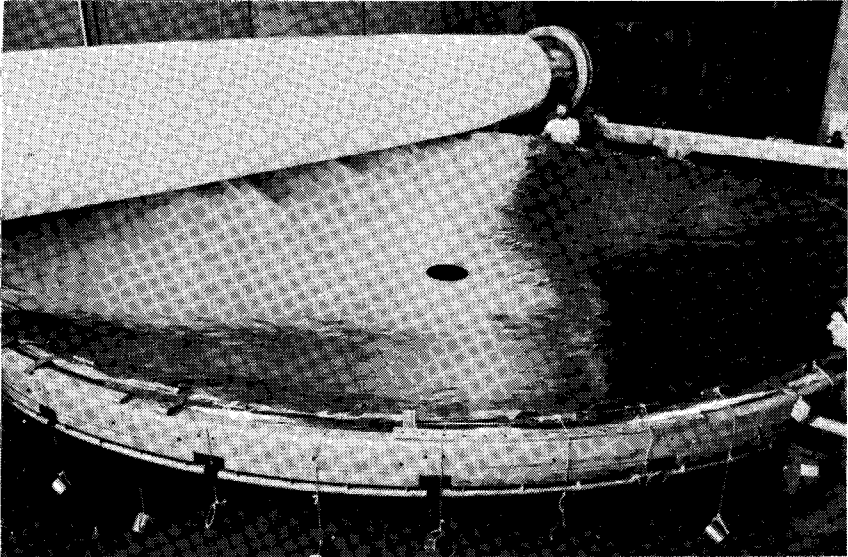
7-M Membrane Being Unrolled onto Dish Ring During Final Field Assembly.
